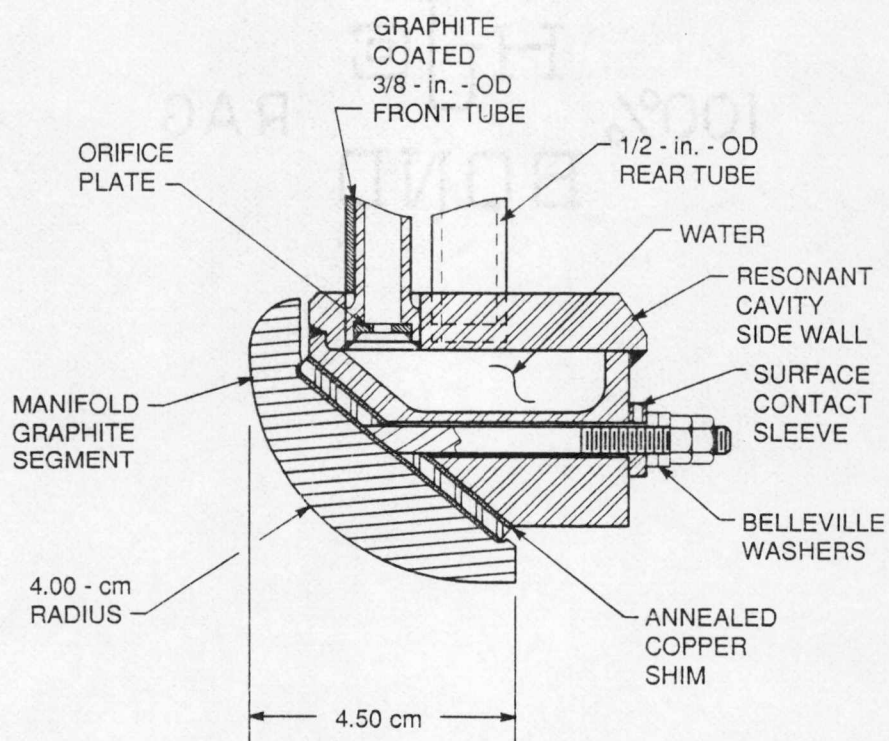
ORNL RDL antenna Faraday shield manifold cross section.
